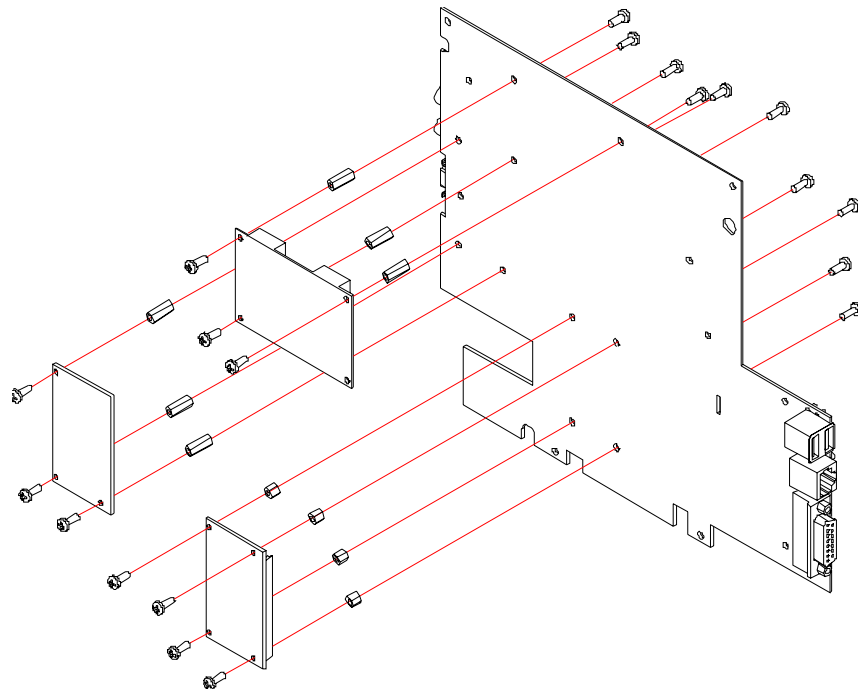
Rear Case Disassembly – ECG Board, SpO₂ Module, CPU Module
